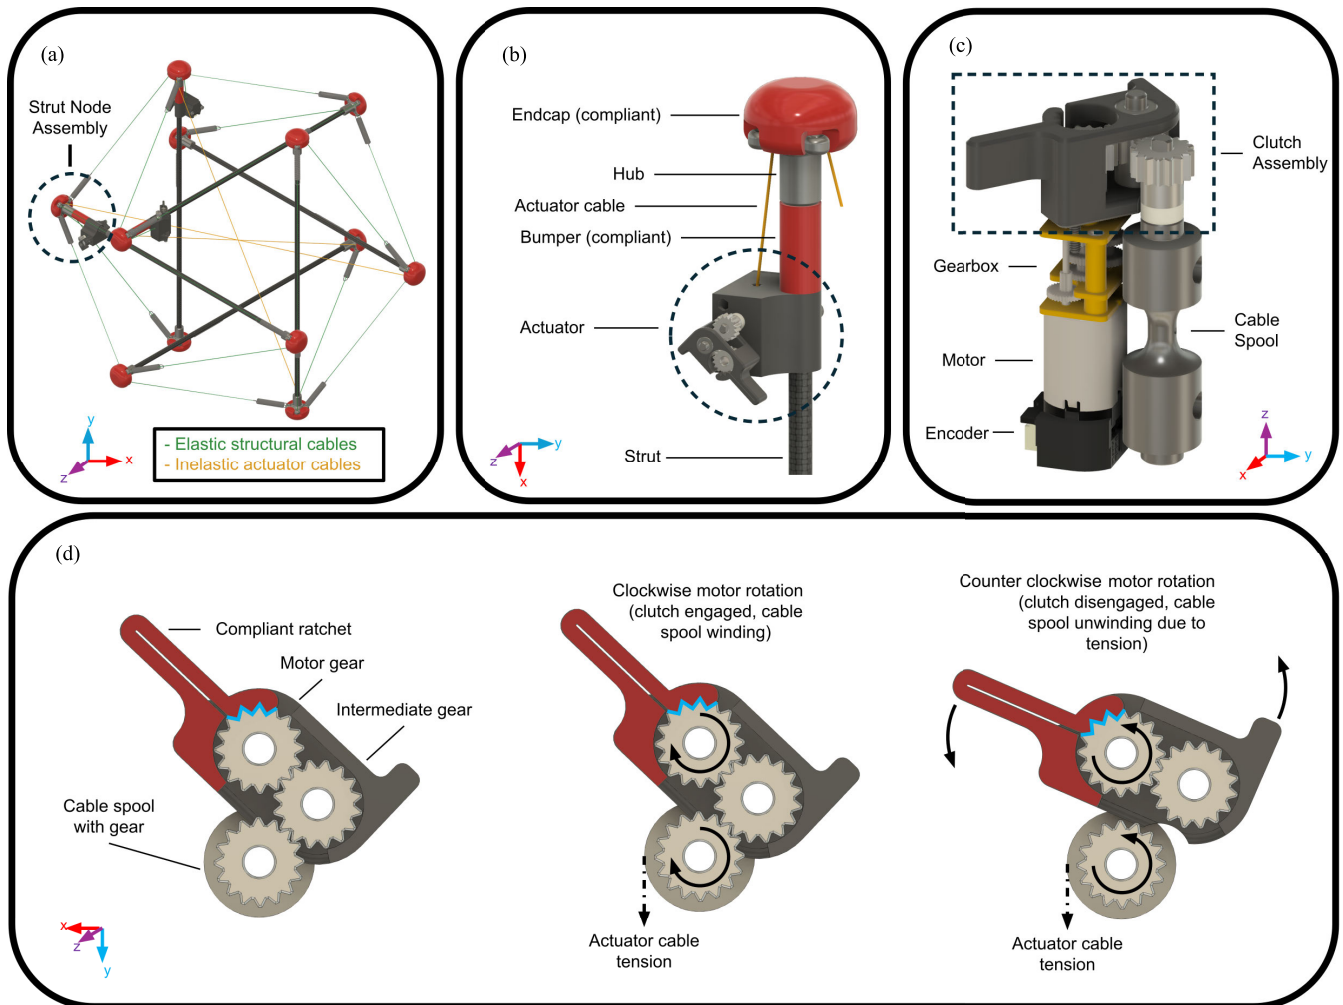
Design of the jumping tensegrity robot. (a) CAD model of robot featuring strut assemblies, structural cables, actuator cables, and actuators. (b) Strut node assembly protects compliant elements, routing for the actuator cable, and attachment points for the structural cables and springs on the hub. (c) Components of an actuator (the protective case has been removed to show the internal components). (d) Clutch mechanism components illustration (for increased visibility, the compliant ratchet is colored red and the engaged ratchet tooth is colored blue).
